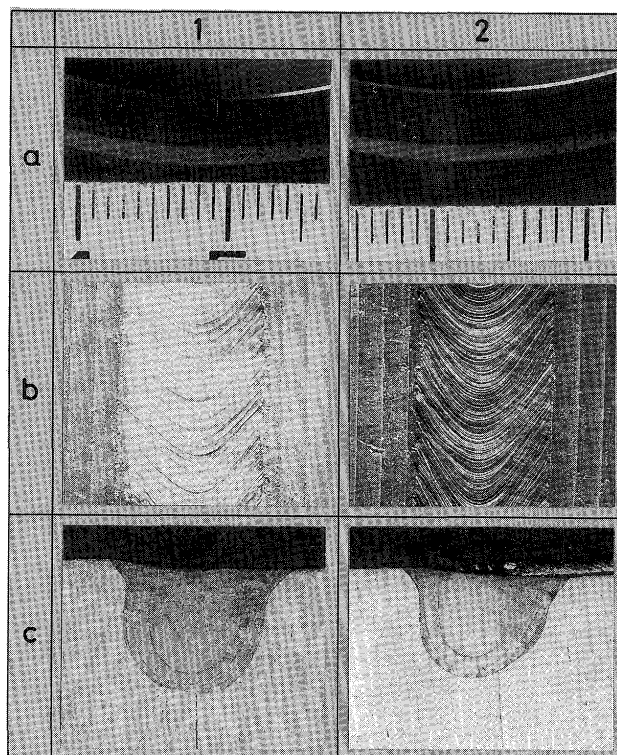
External appearances (a), their magnifications (b) and transverse cross sections (c) of the weld part.
